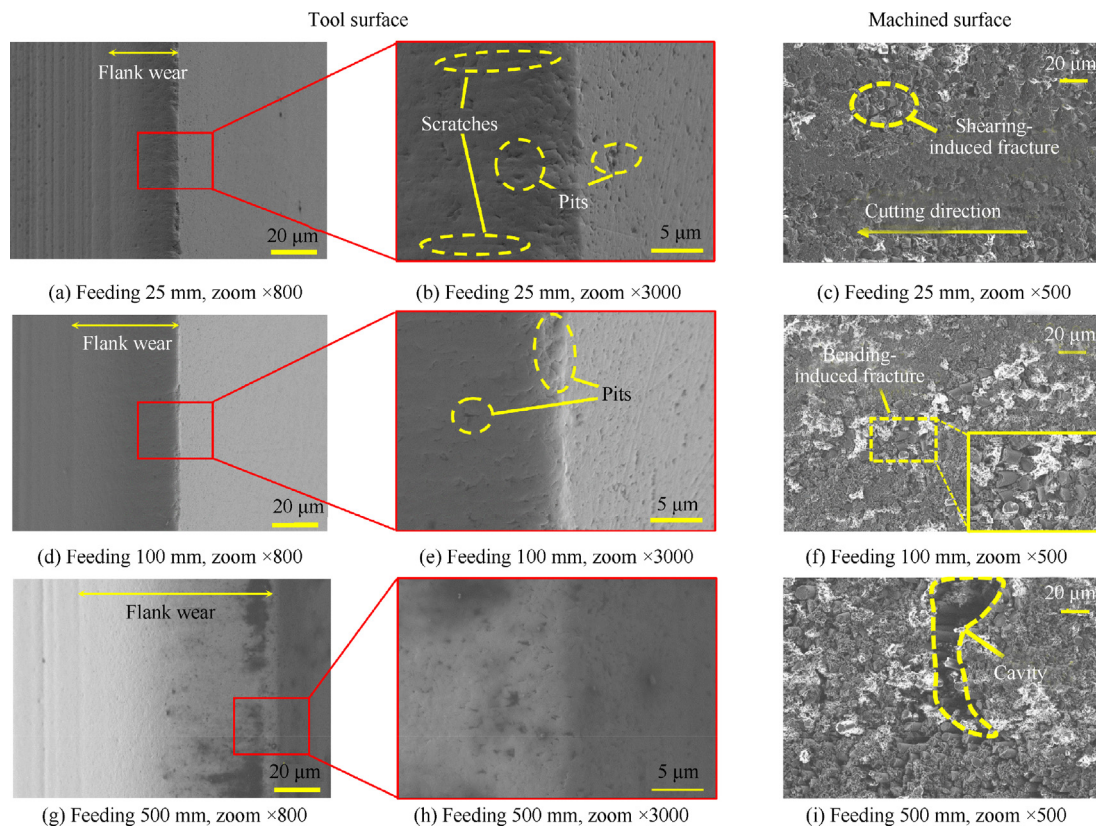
SEM images of worn tools and machined surfaces after feeding 25 mm, 100 mm and 500 mm when $\theta = 45^\circ$.
